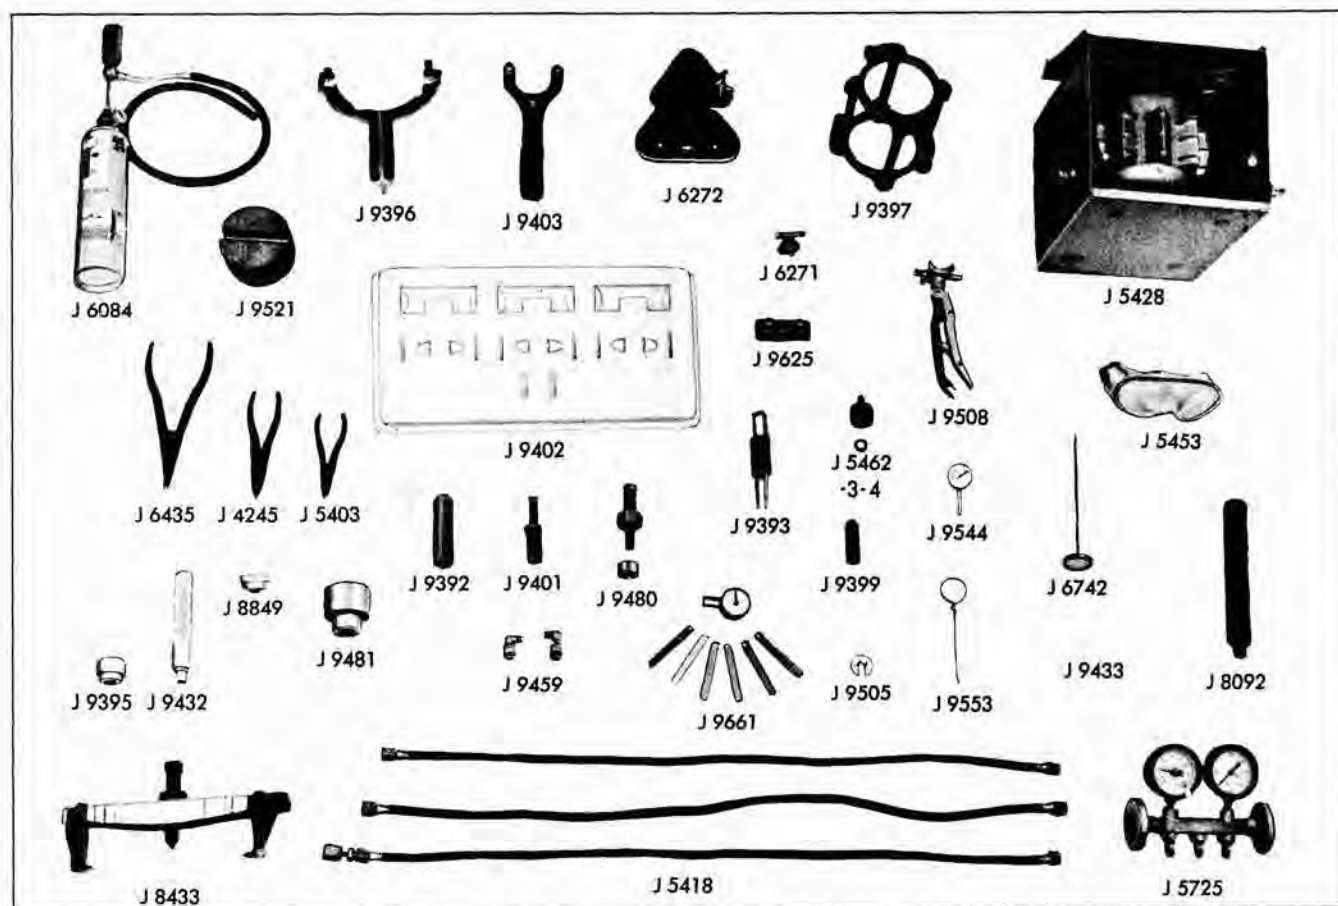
Special Tools Required to Service Air Conditioning Installations
